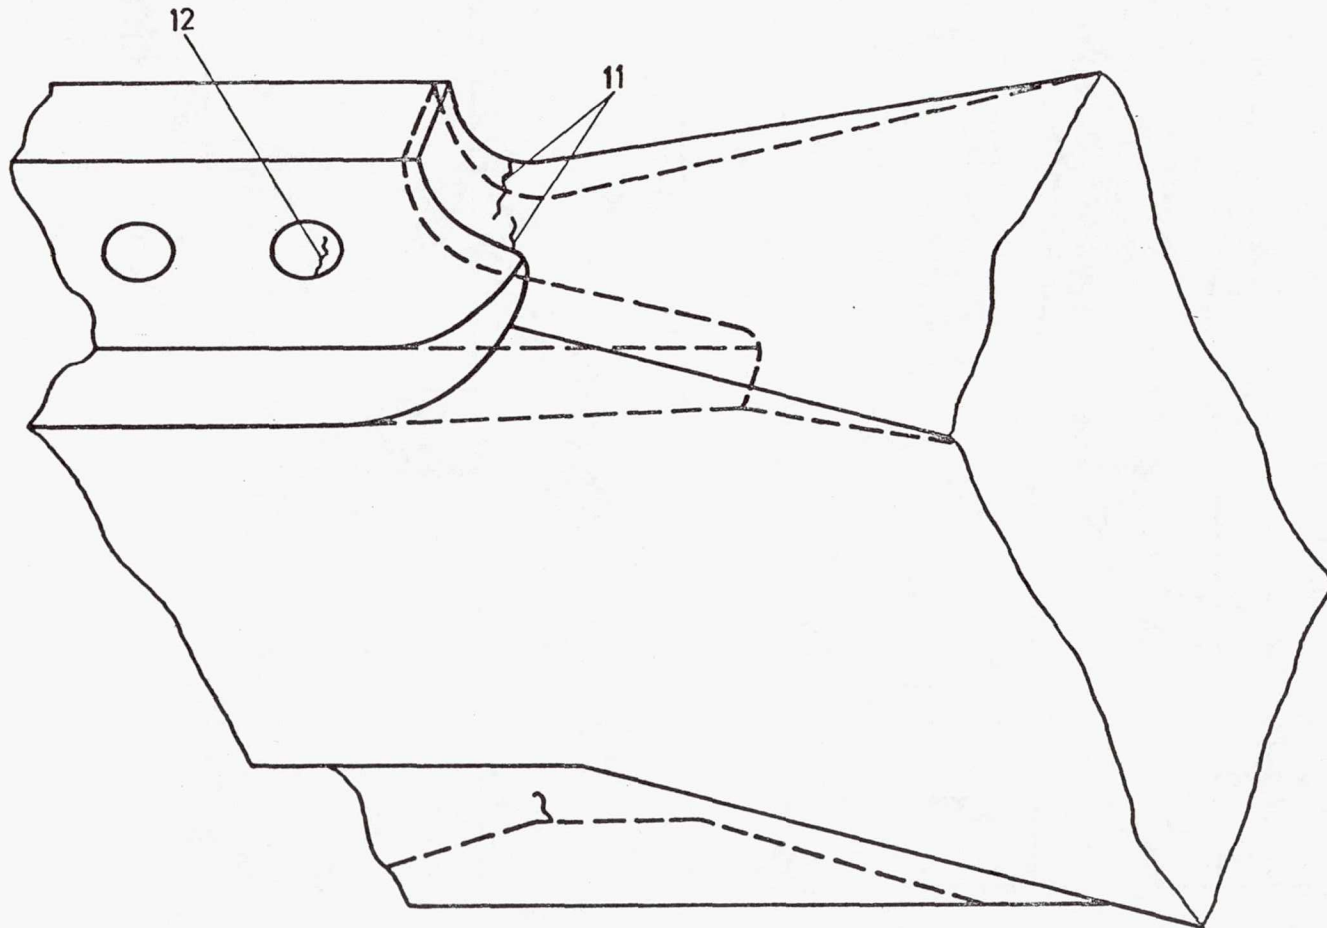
Test specimen A<sub>1</sub> with cracks found. Solid lines indicate original specimen in which cracks 11 occurred. The cracked material was milled off and the shape of the specimen modified as shown by dashed lines before occurrence of crack 12.
